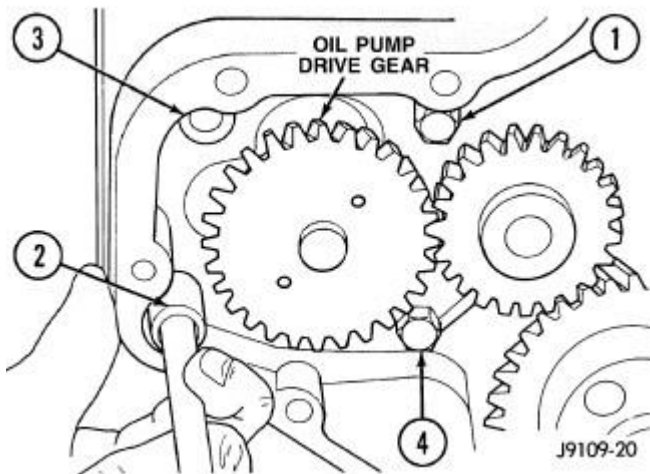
Oil Pump Mounting Bolt Torque Sequence
